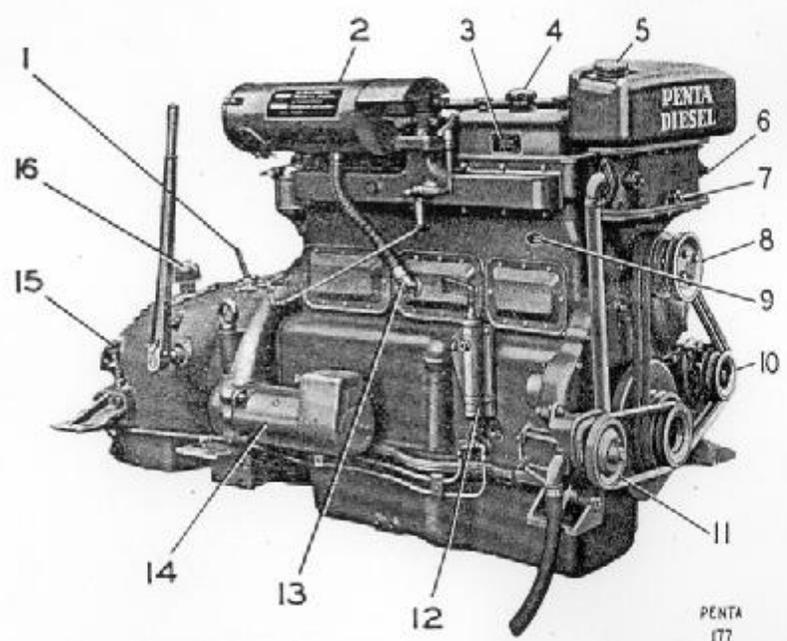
MD 67 engine with Twin Disc reverse gear.
